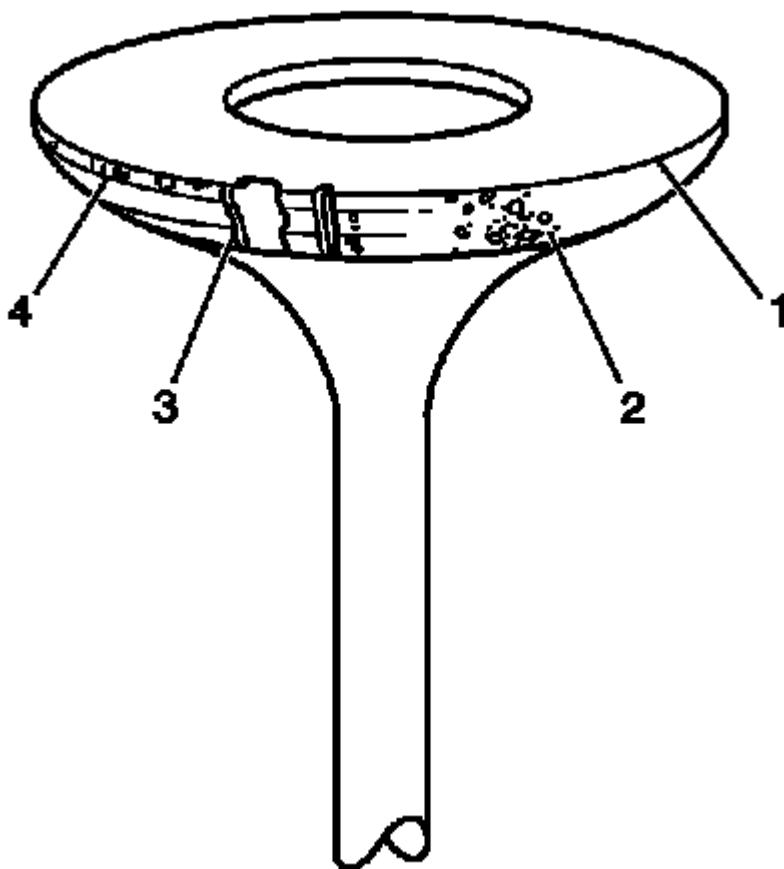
Inspecting Valve Face For Burning, Pitting & Cracking
